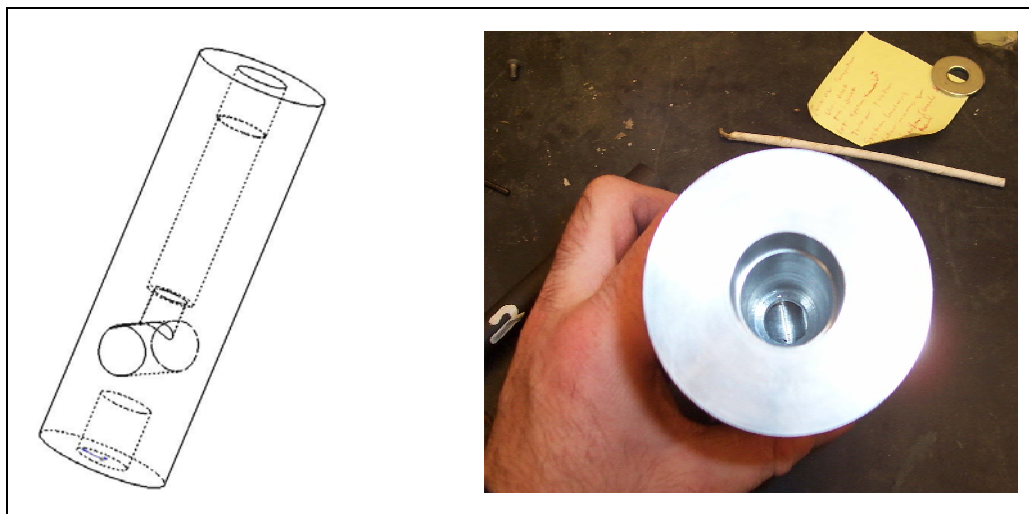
Drawing (left) and a top view of the barrel adapter (right).
